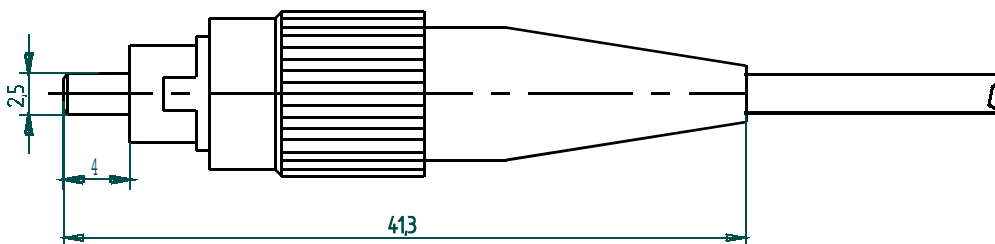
NPC205 Jumper Cable (diameter 2,8 mm Cable type):
